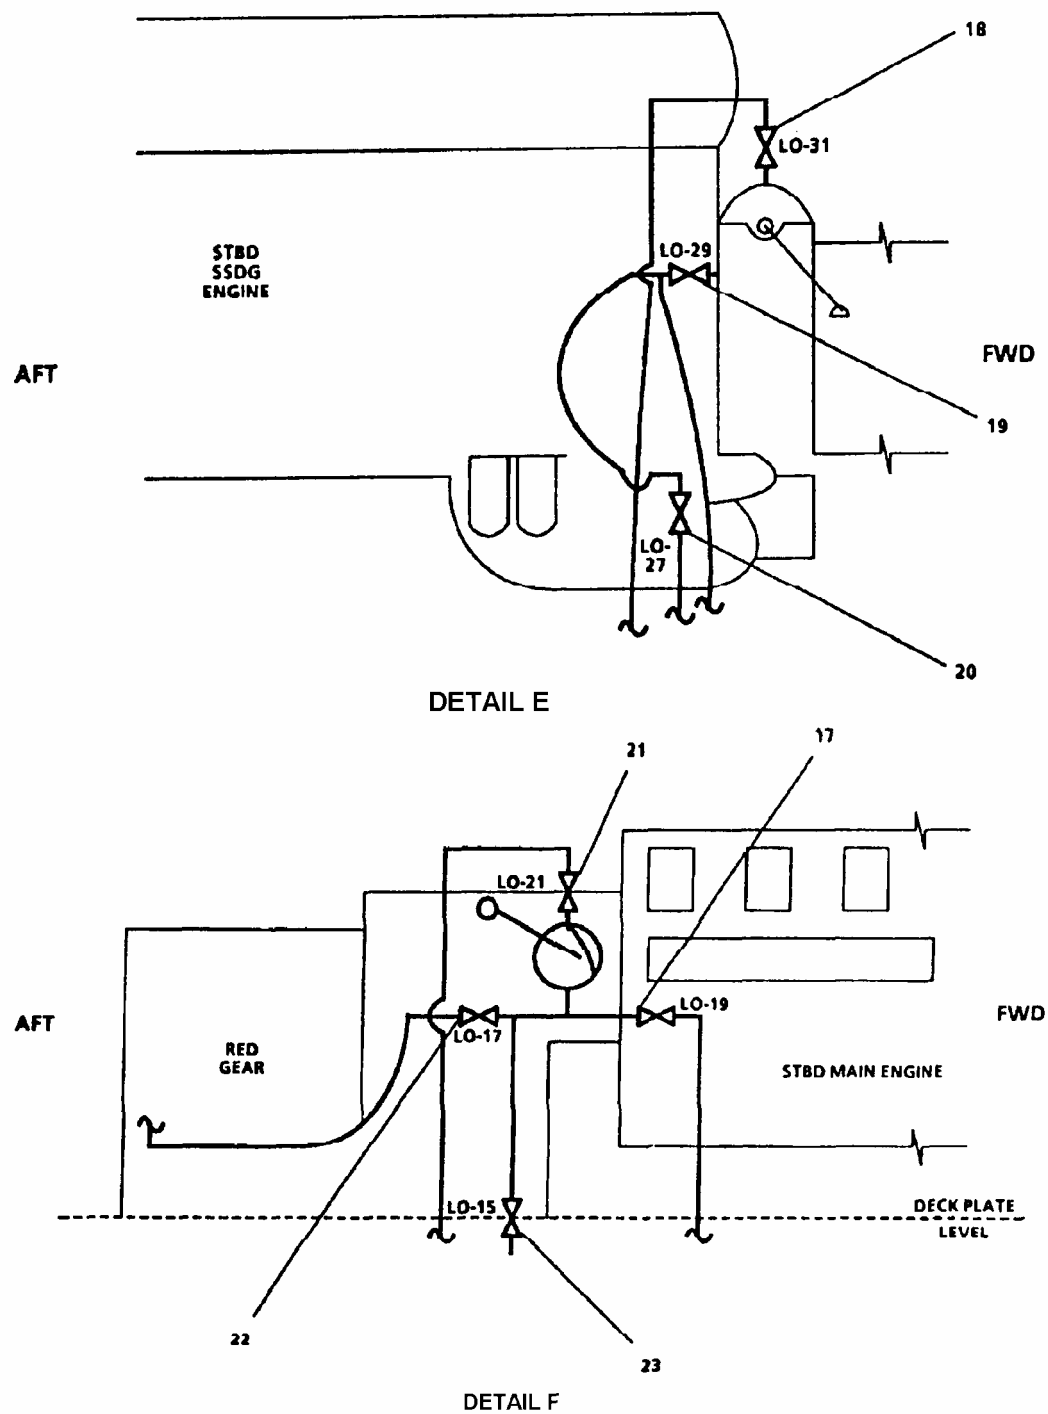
Lubricating Oil Transfer Piping System (Sheet 5 of 8).
